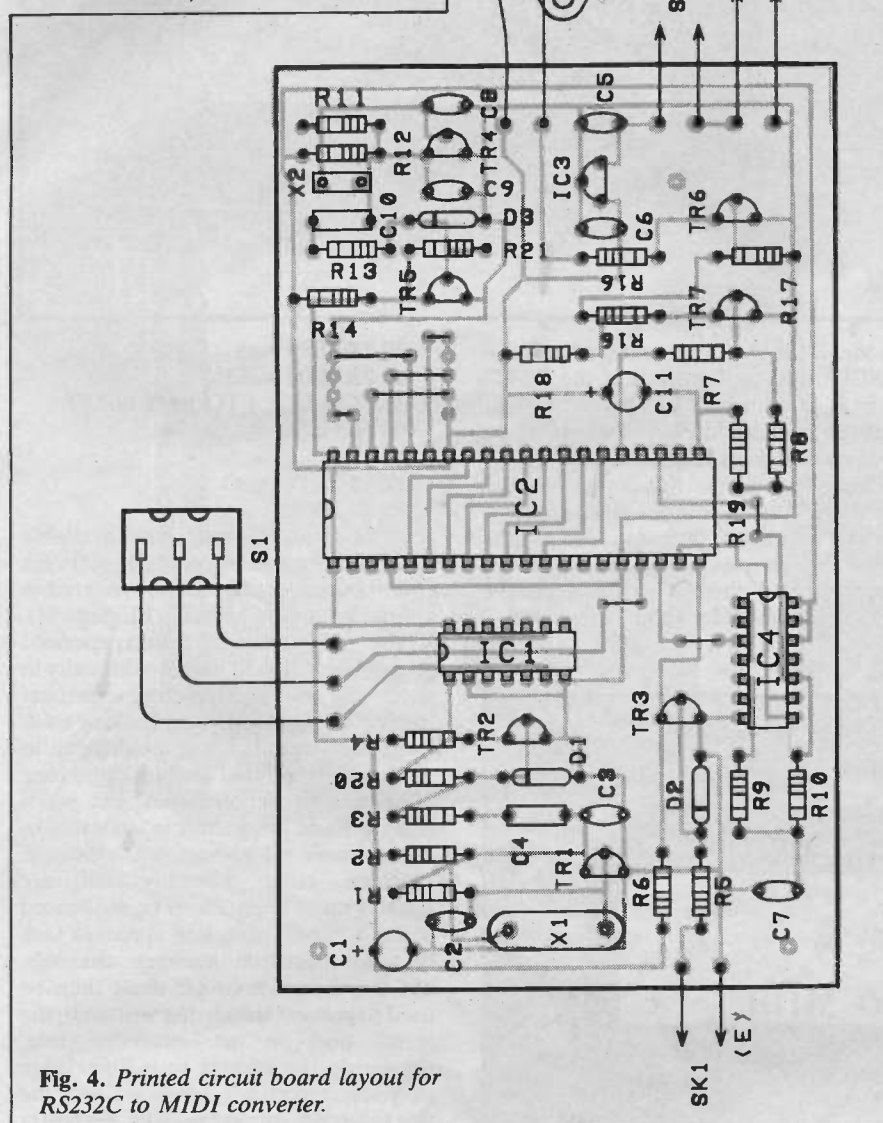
Printed circuit board layout for RS232C to MIDI converter.
